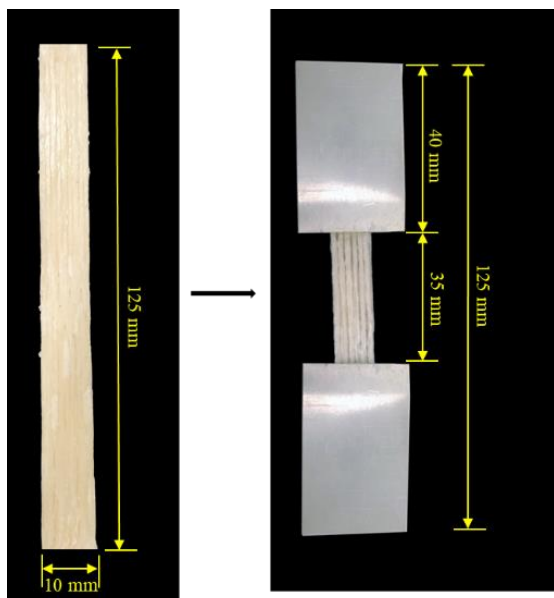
3D printed tensile specimen (left), mounted specimen for tensile testing (right)
